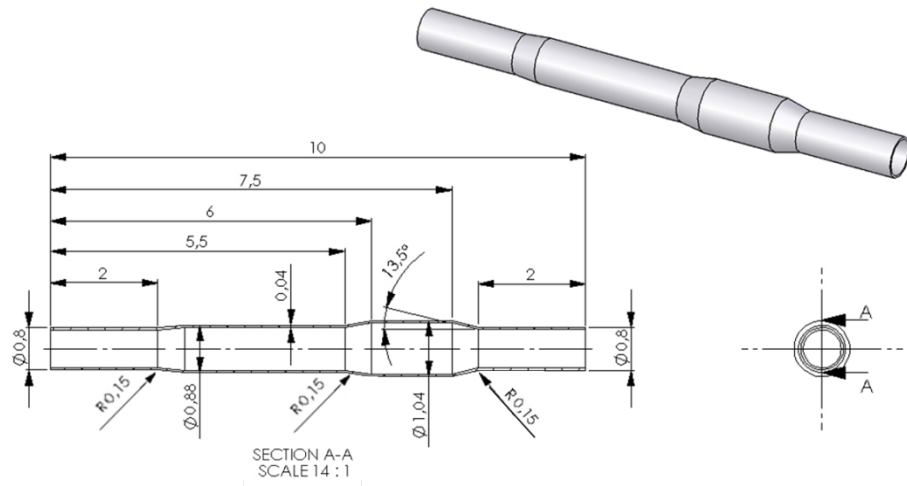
Investigated tube geometry 'camera shaft', 2D and 3D drawing
